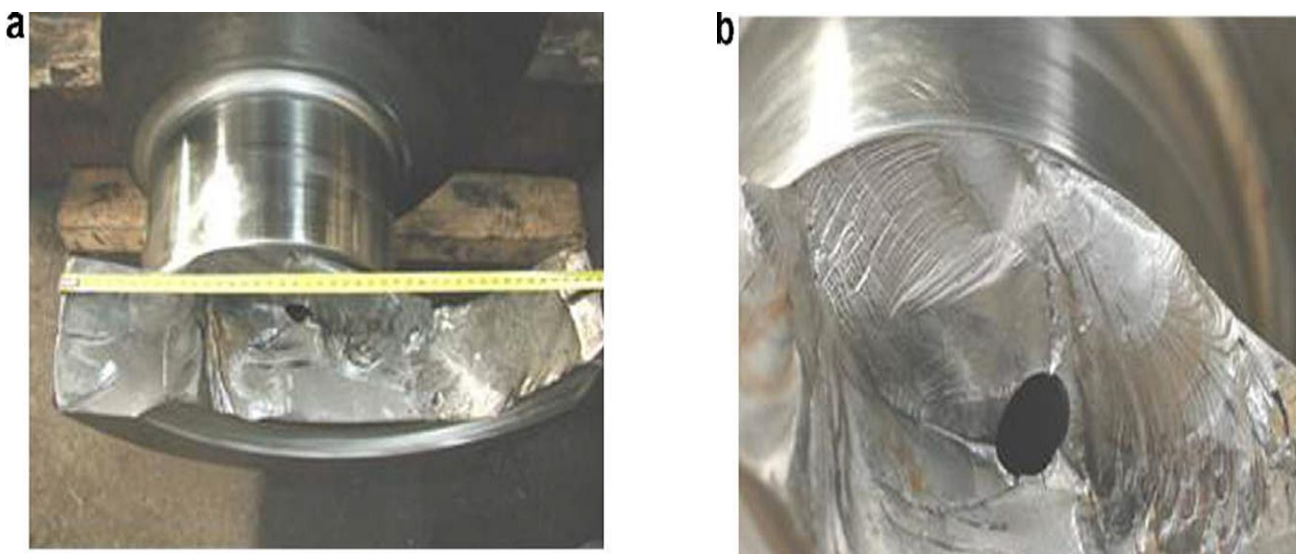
Failure surface. (a) Parallel to the axis (final fracture) and (b) perpendicular to the axis (fatigue crack growth).
